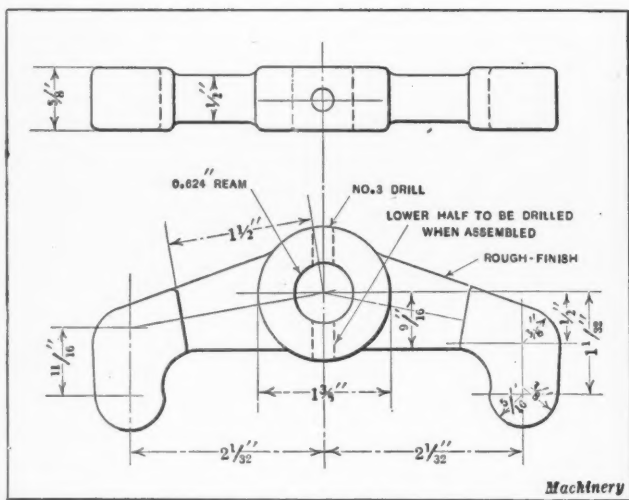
Drop-forging trimmed with the Equipment shown in Fig. 5
